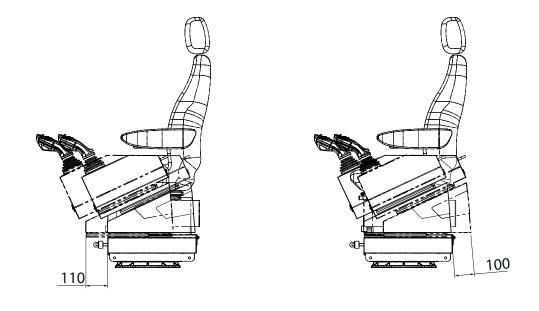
Control stand SV1C Premium-Line: Dimension drawing 3 (dimensions in mm)
